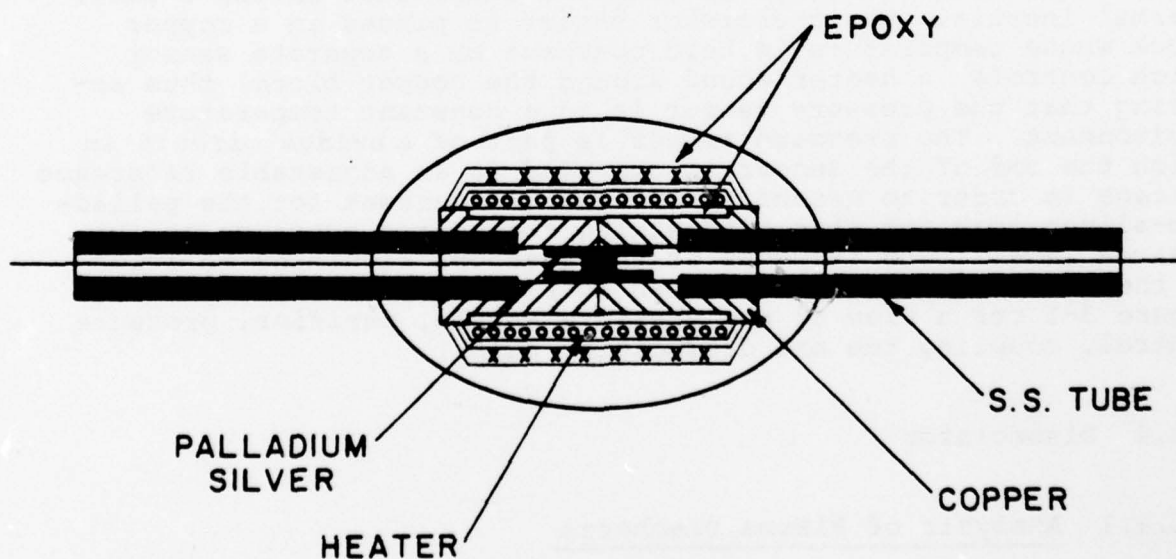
Mechanical Assembly of Hydrogen Purifier
